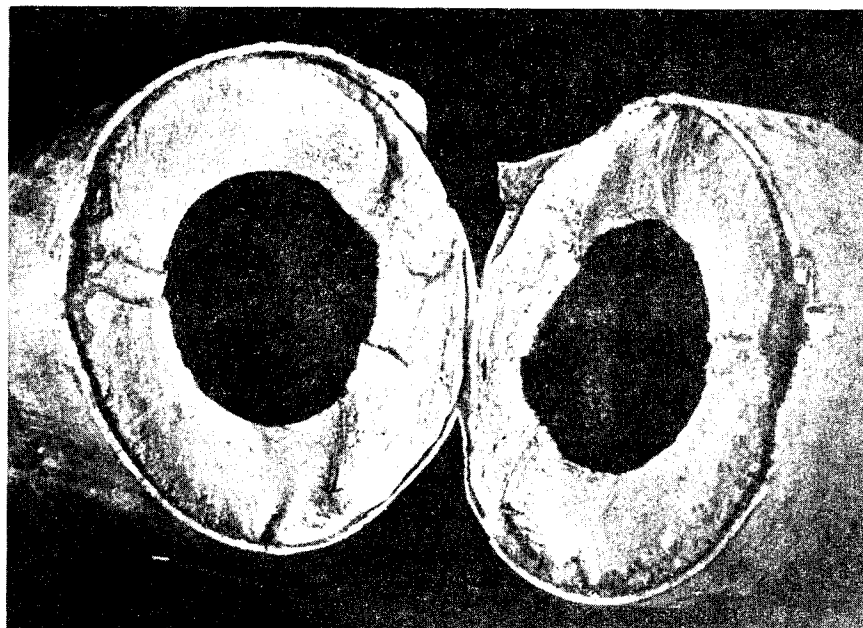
Transverse section of shaft showing small hole in outer nickel plate which caused a large pit in the hollow steel shaft.
